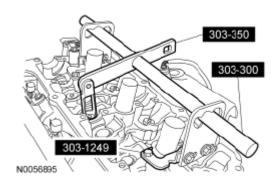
Identifying Valve Spring Compressors Courtesy of FORD MOTOR CO.
